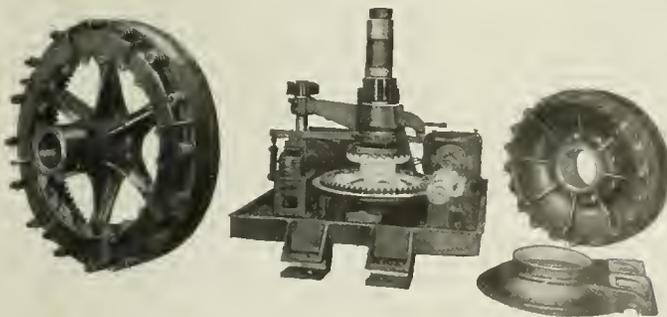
Parts of the Windlass and Base and a Partial Assembly
